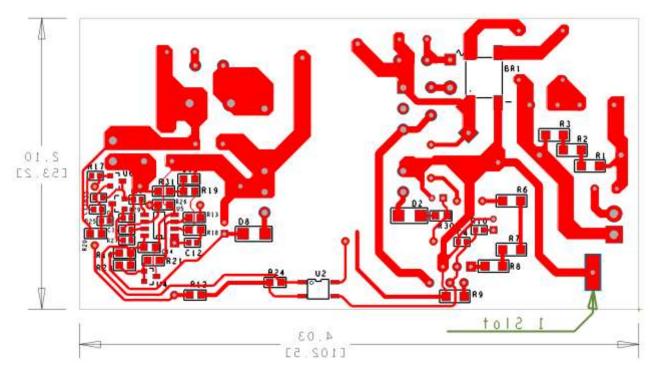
Printed Circuit Layout, Bottom Side Traces and Components.
